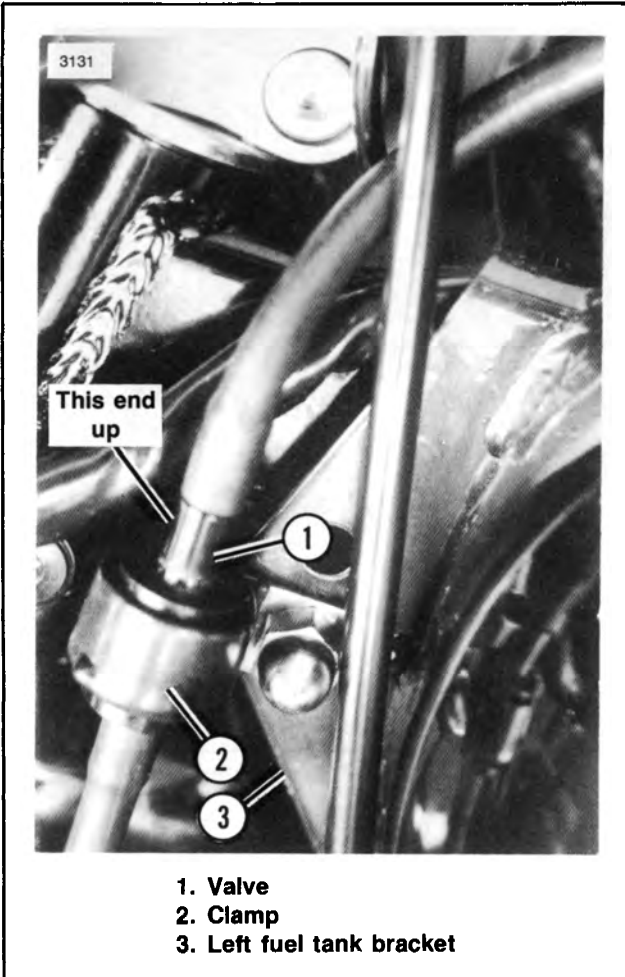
Vapor Valve Location — FXR, FXRS/SP, FXRS-CONV
